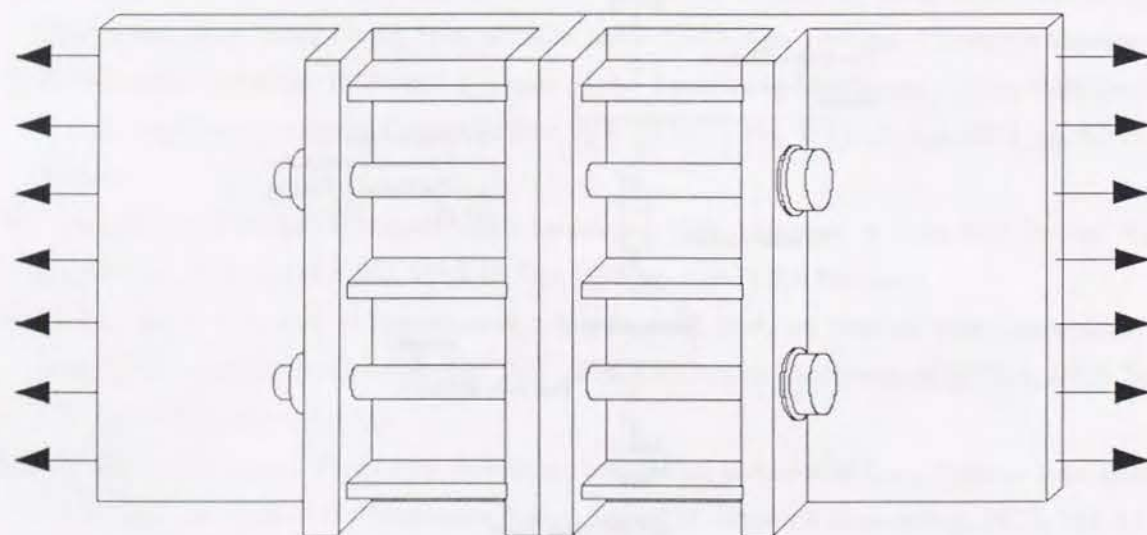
Load Transferring Mechanism of the Connection using Fastener
